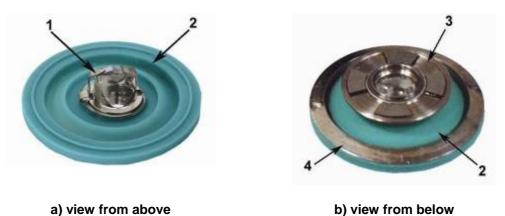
Probe holder inserted into the diaphragm 1 – probe holder; 2 – diaphragm; 3 – probe holder washer; 4 – ring
